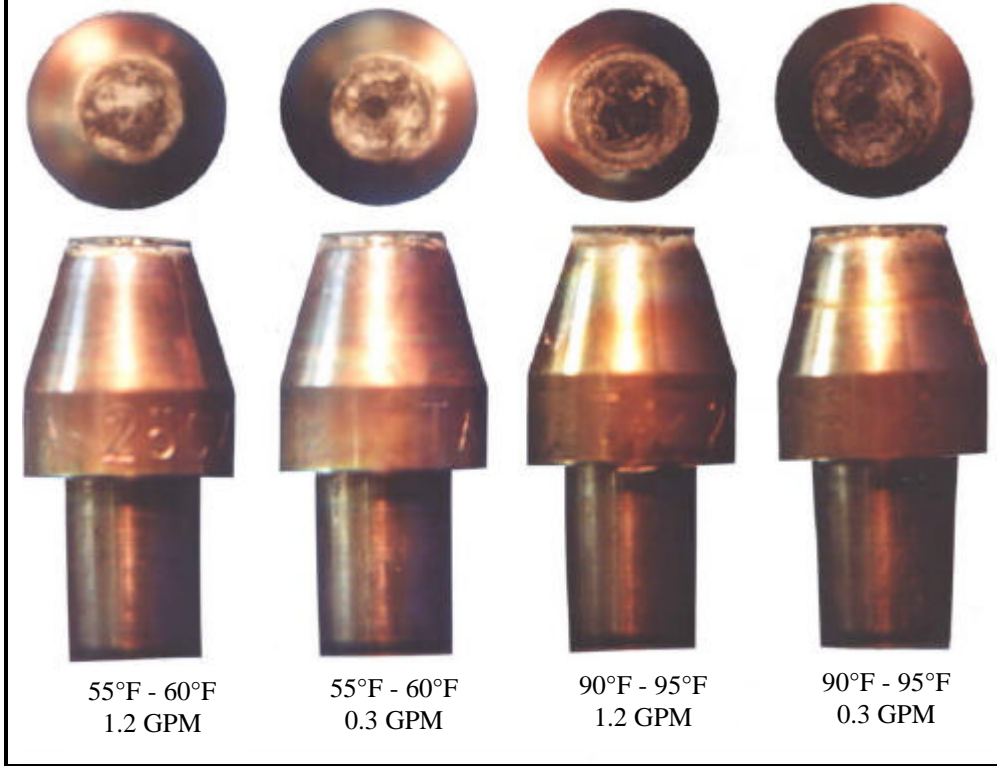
ELECTRODES AFTER 3,000 WELDS ON .031 G90
